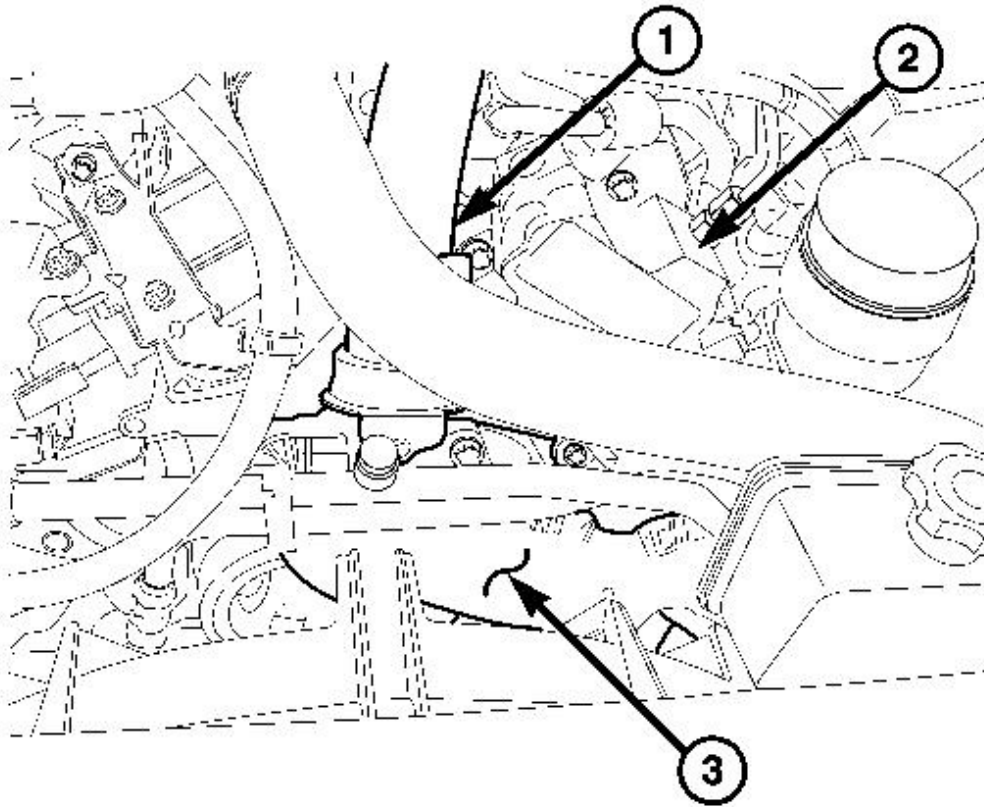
Vacuum Pump, Glow Plug Relay, EGR Cooler & Air Control Valve
